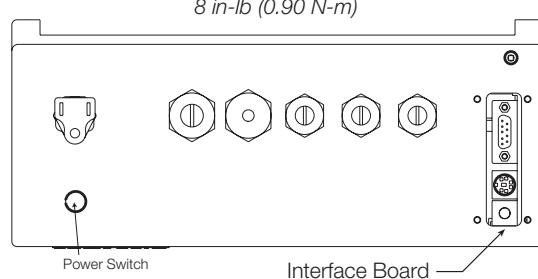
Interface Board and Fuse Locations, Universal Model
